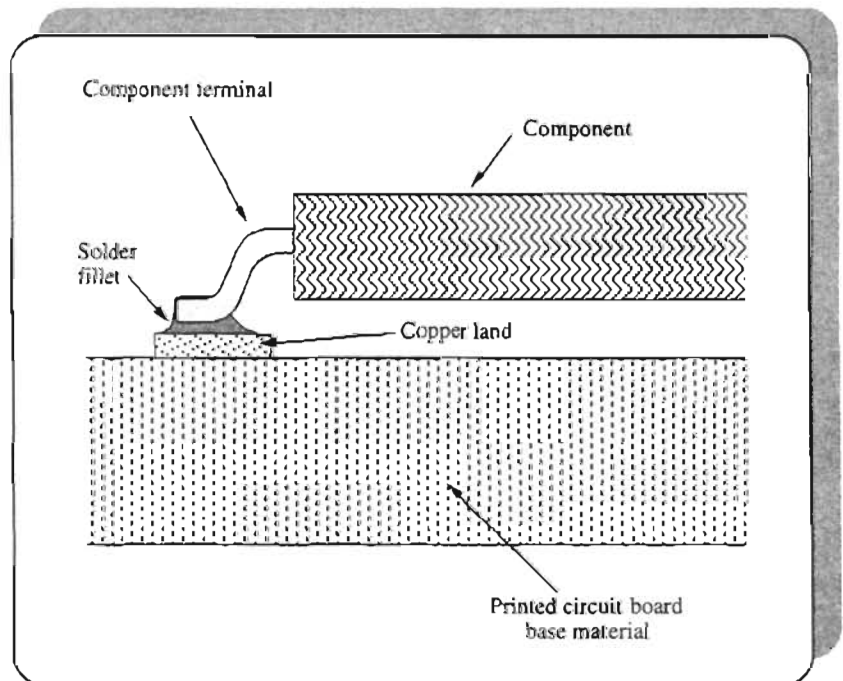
Compliant lap joint — commonly called a gull-wing joint, formed when soldering a multi-terminal short-leaded surface mounted component
